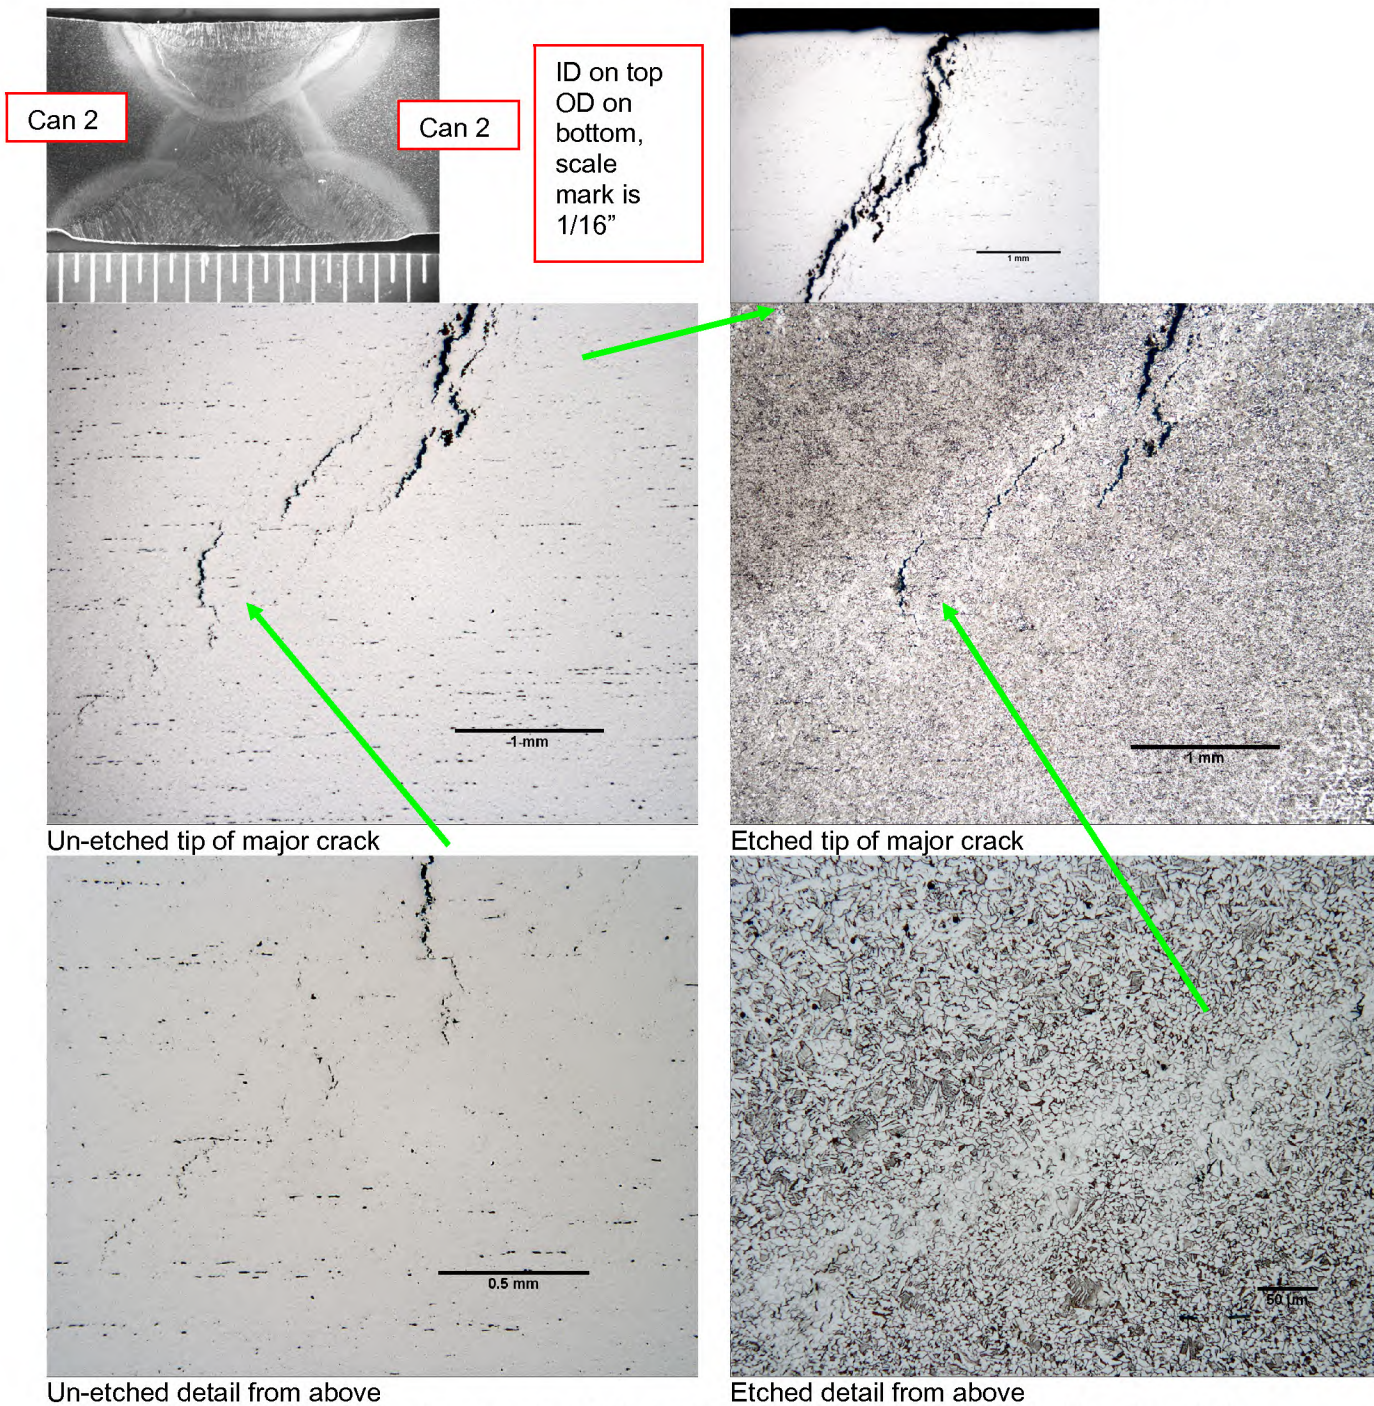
Photomicrographs of Mount T2L at right side Weld Metal side of crack tip
